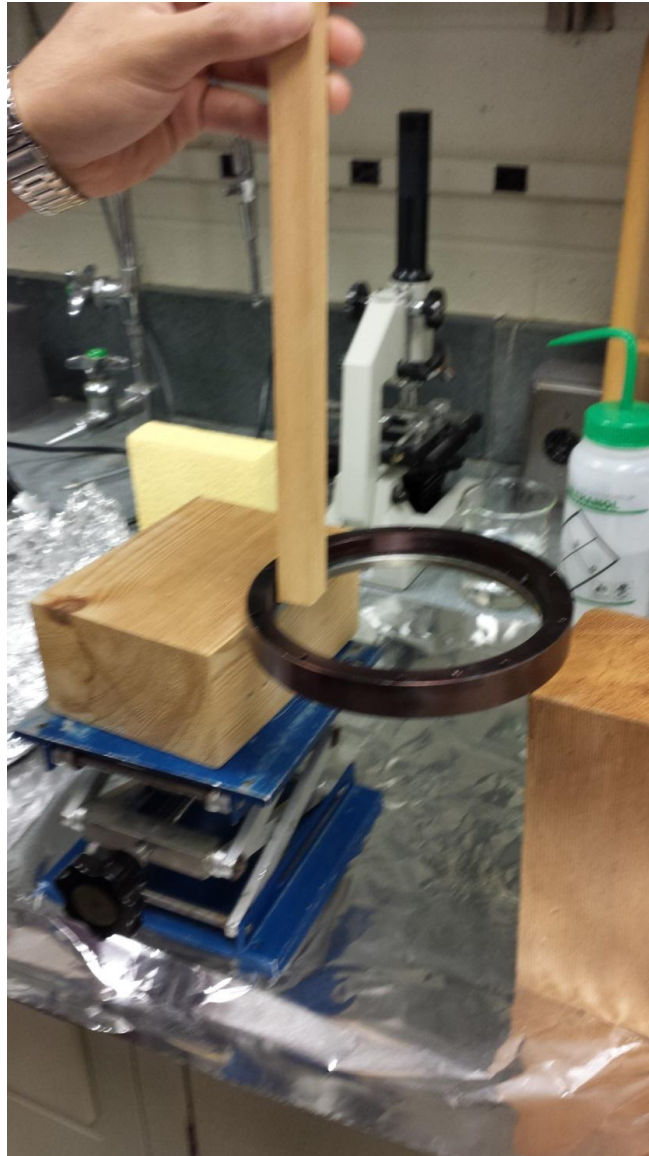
Image that shows the proper procedure to remove the bearing from the bearing retainer ring. The ring is first placed upside down on wood to prevent marring. Then, place a piece of wood against the bearing and gently tap the wood using a hammer. Repeat this procedure evenly around the bearing.
